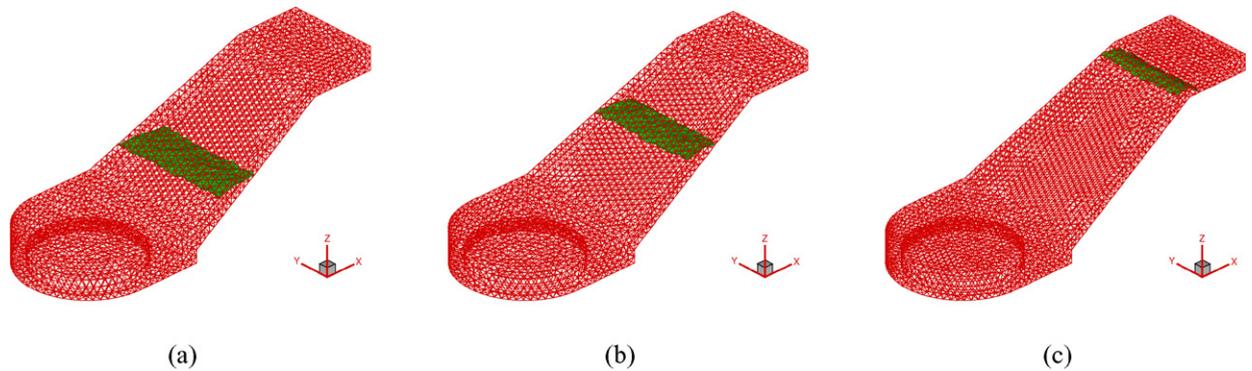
Three-dimensional shape of the metal front, for different punch displacement: (a) 3 mm, (b) 6 mm and (c) 9 mm.
